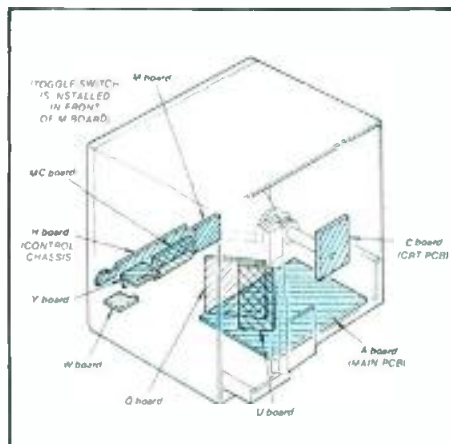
PCB location guide. Control switch mounts in front of the M board. Relays and components mount on the C board.
